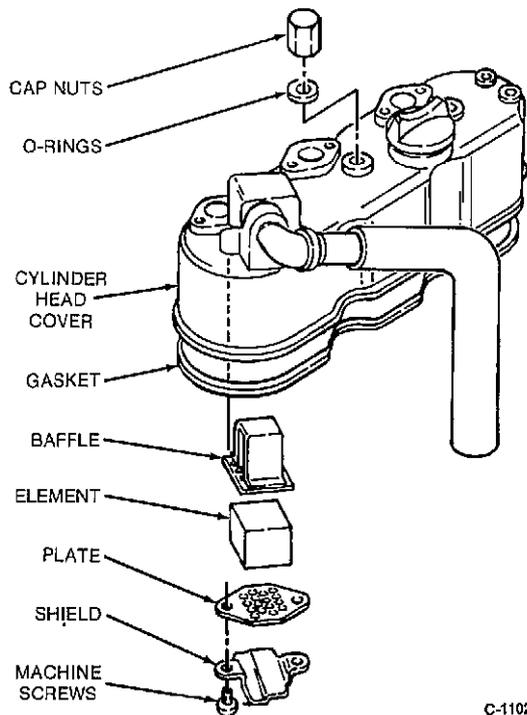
CRANKCASE BREATHER ASSEMBLY
